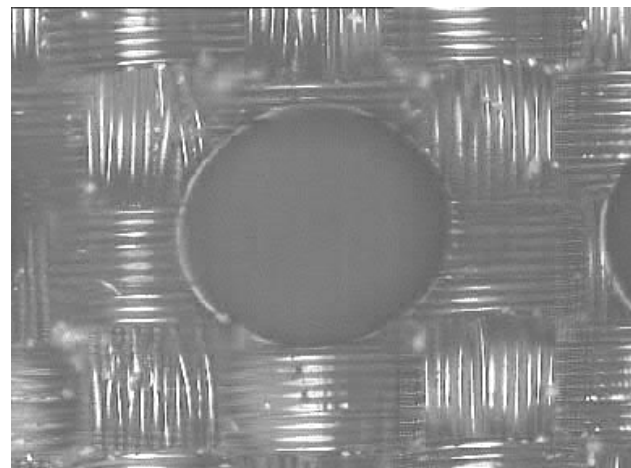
MTM44-1 x10mag Hole diameter 0.5mm
